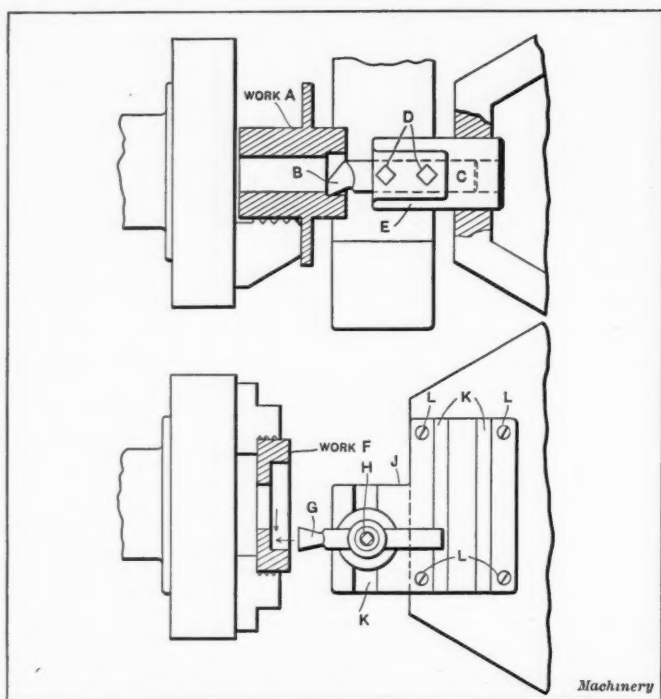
(Upper View) Single-point Starting Tool; (Lower View) Boring and Facing Tool
